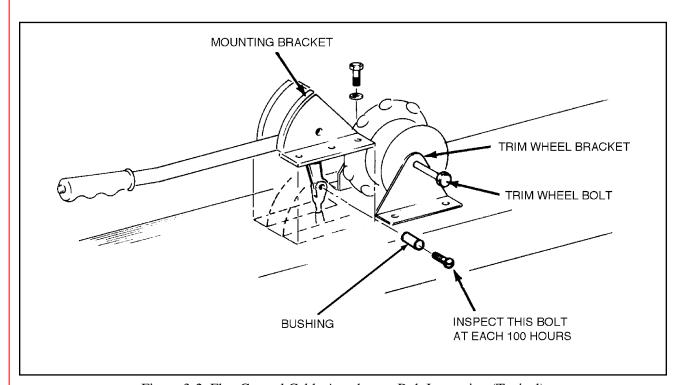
Flap Control Cable Attachment Bolt Inspection (Typical)
